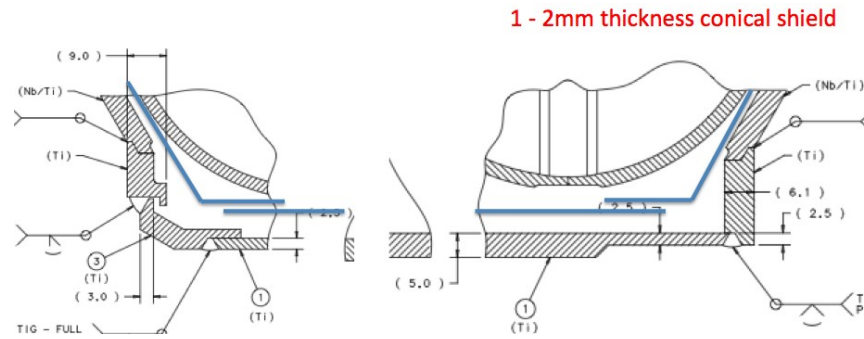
Sketch showing the overlap of the cylindrical and conical shields at the ends of the cavity.
